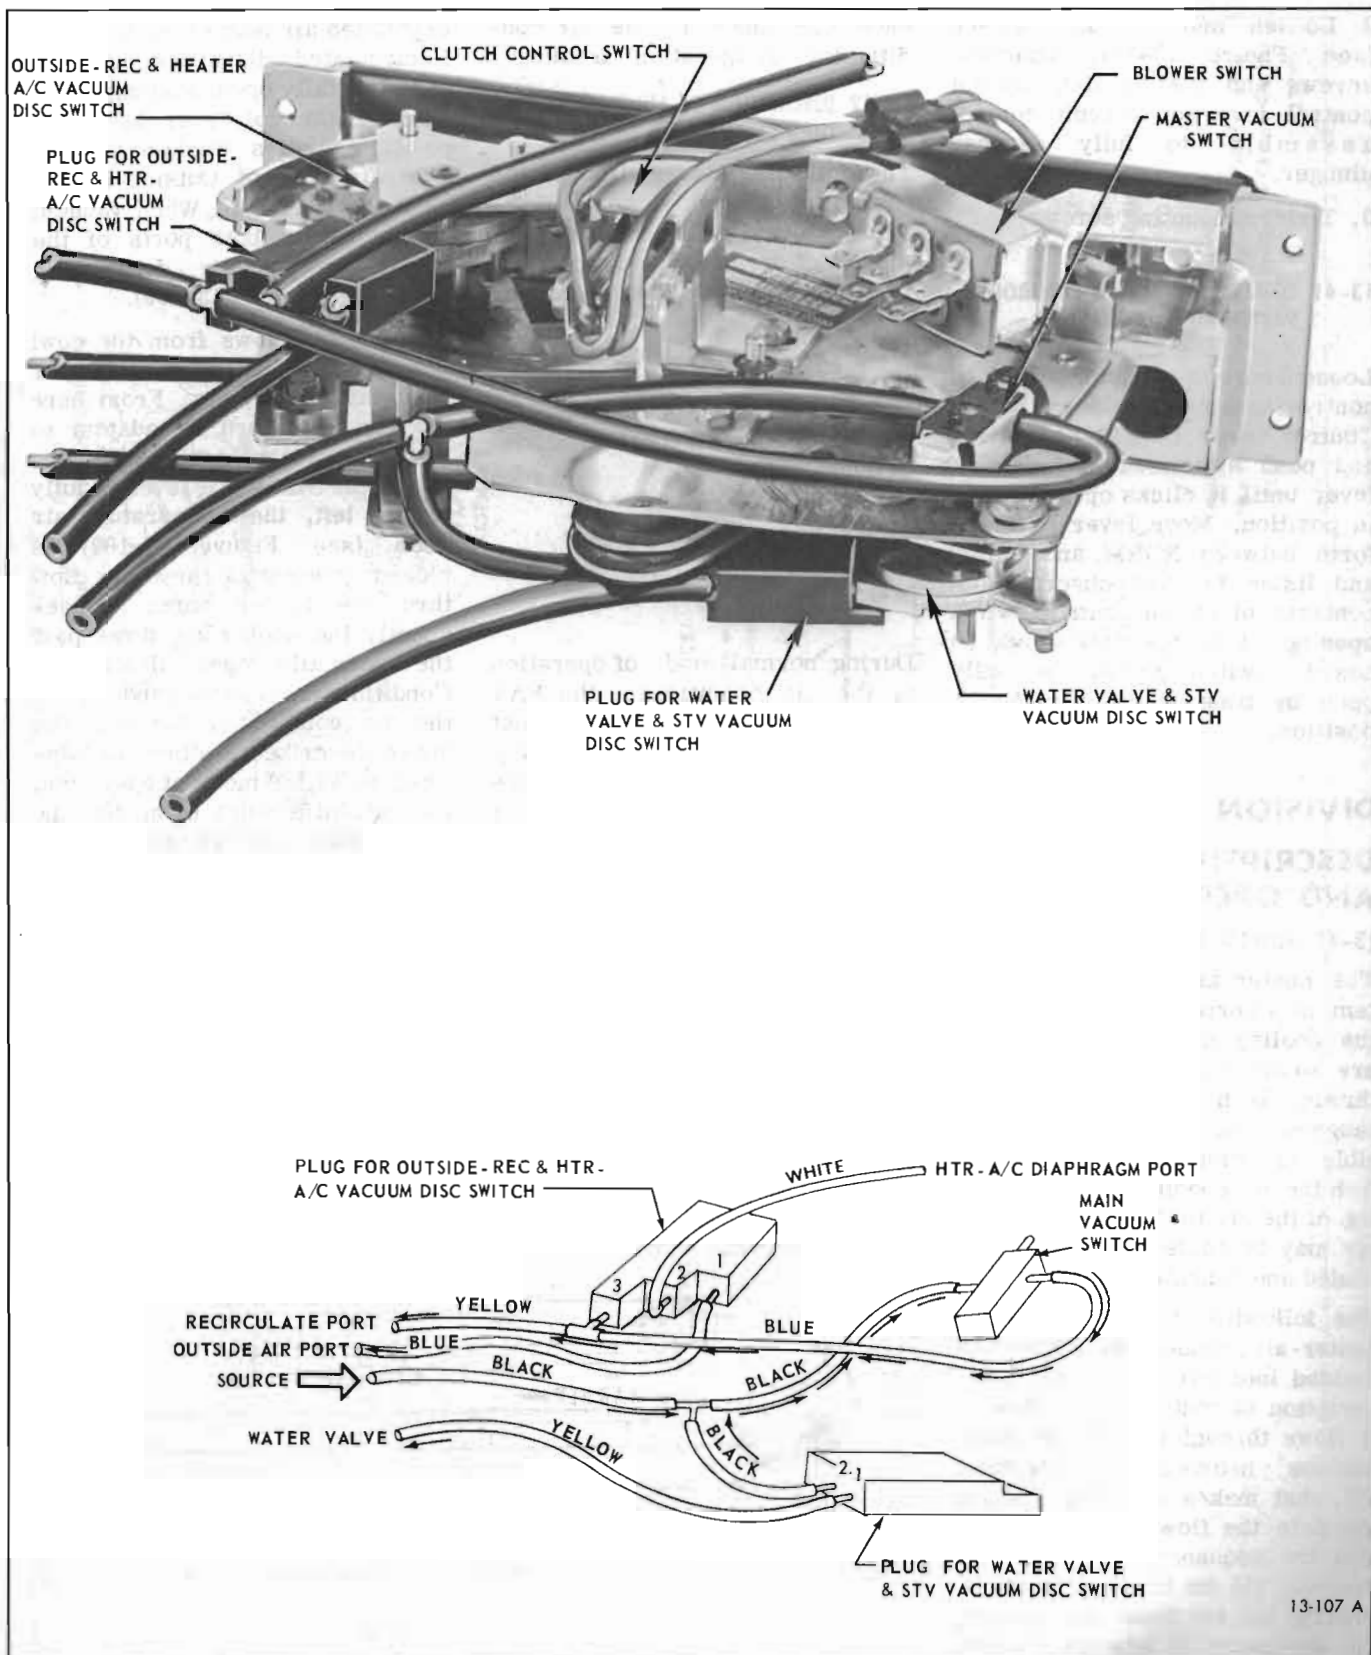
Vacuum Hose Installation at Rear of Control Assembly
